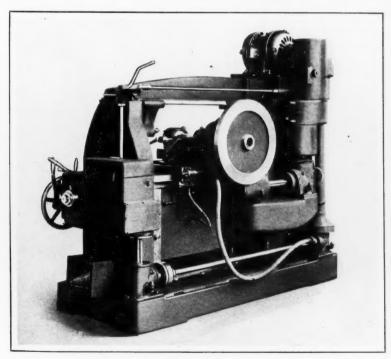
Rear View of Hobbing Machine from the Feed-box End, Showing the Driving Arrangement
